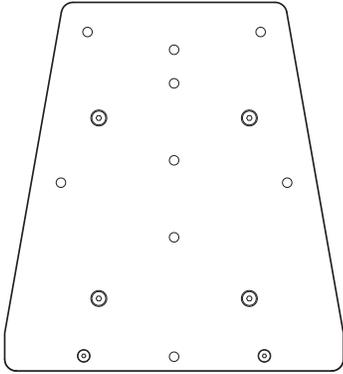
UPJ-1P Top Plate with Threaded Holes for eye bolts
